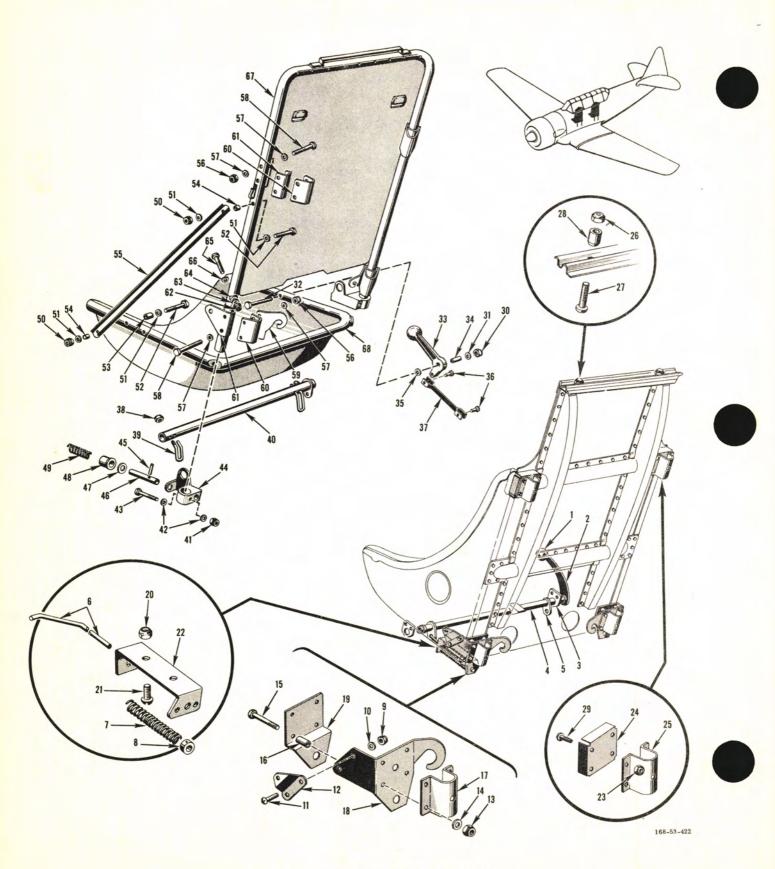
PILOT'S SEAT ASSEMBLY
